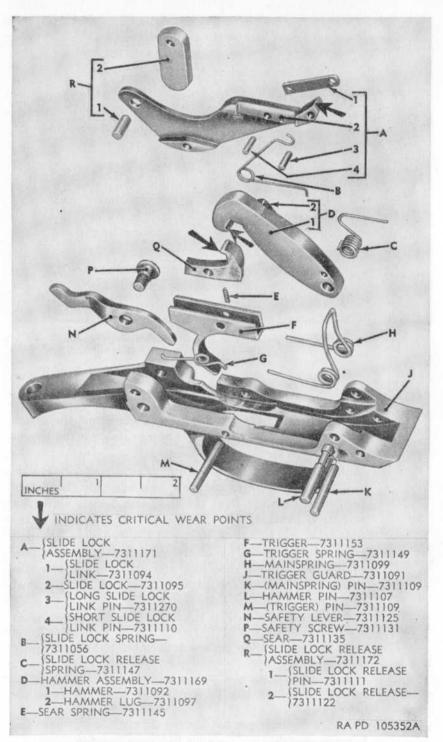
Trigger guard group for Stevens shotgun M520-30-exploded view.
